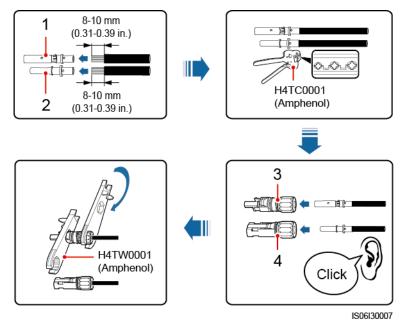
Preparing positive and negative connectors (using metal cold forming contacts)
